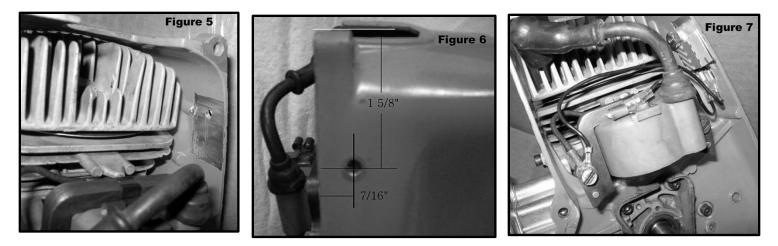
shows the *Mega Fire* electronic ignition module and Figure 2 shows your McCulloch at the start with all the original ignition components in place. In Figure 3 you can see the ignition area with all the parts removed and Figure 4 shows all the parts that are no longer needed. Figure 5 shows where to grind away the casting rib and pad area in order to properly mount the *Mega Fire* unit. Figure 6 illustrates (from the back of the engine's sideplate) where to layout to drill the 3/16" diameter hole in order to mount the unit. Finally, in Figure 7, you can see the position of the wires after the unit has been mounted and is ready for operation. Don't switch the wires!
